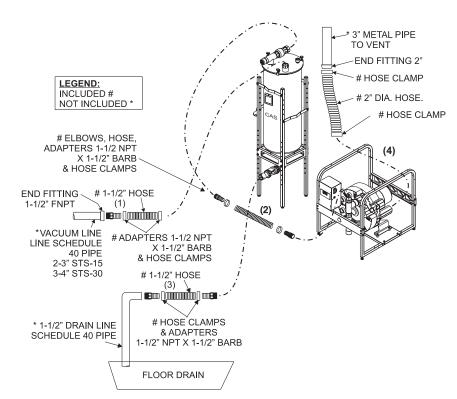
STS Pump and CAS Tank Pipe Connection Diagram
